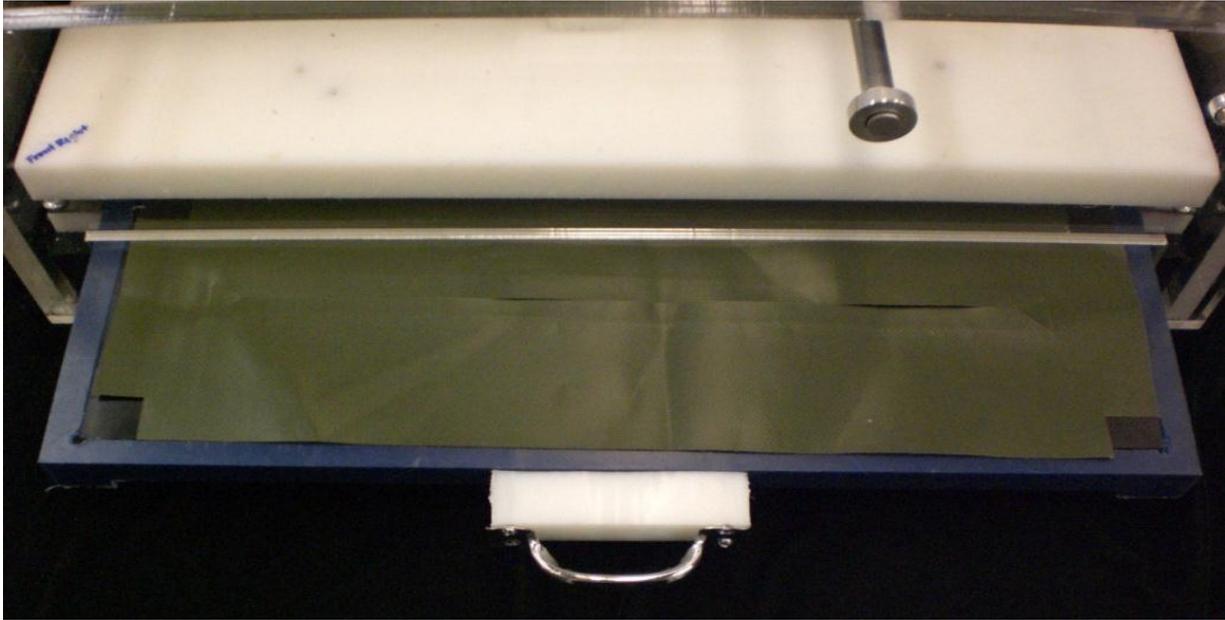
Finished cut-outs for the pockets using the cutting design.
